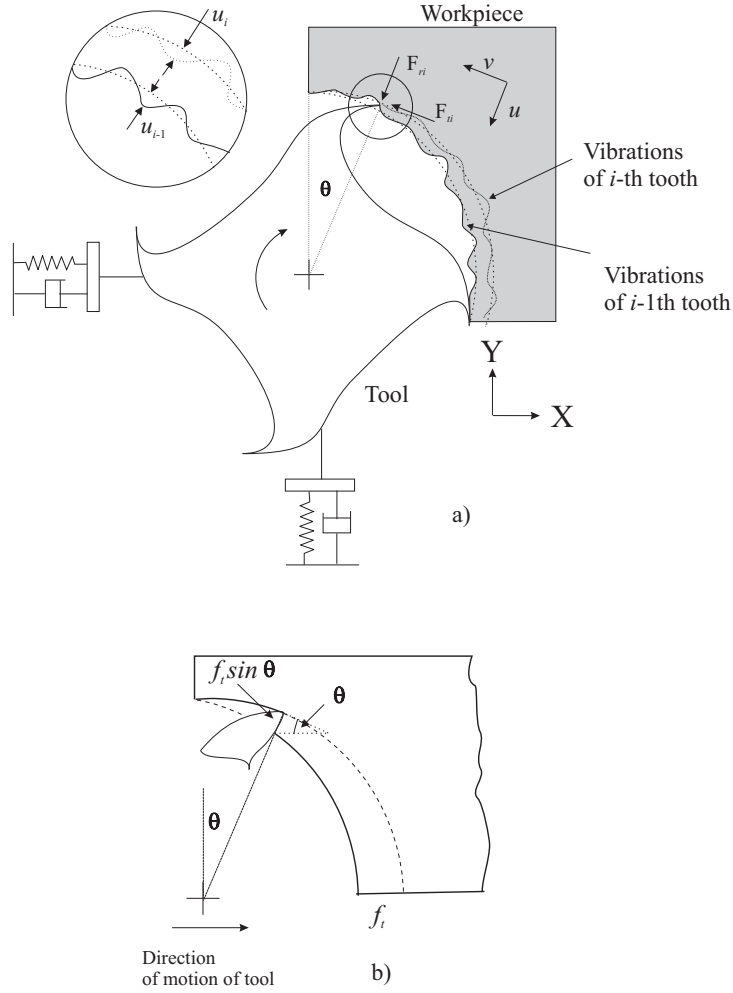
a) A flexible 2 DOF milling tool system b) Horizontal feed in milling
